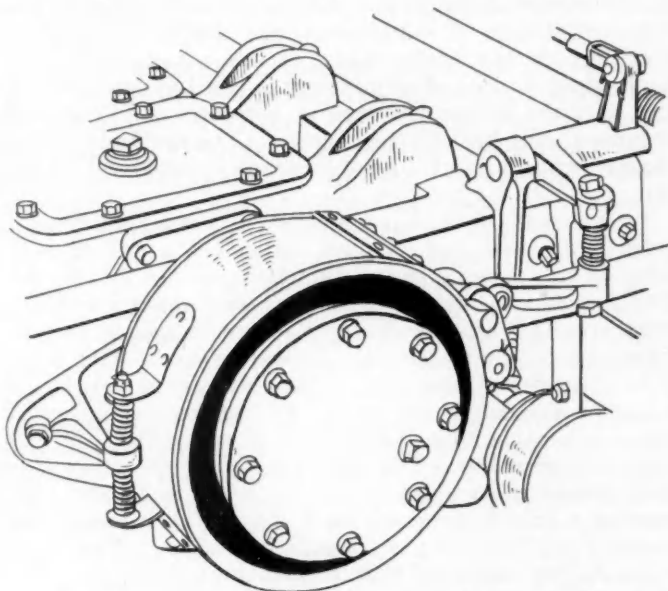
BRAKE EMPLOYED ON A FOUR-WHEEL-DRIVE TRUCK
